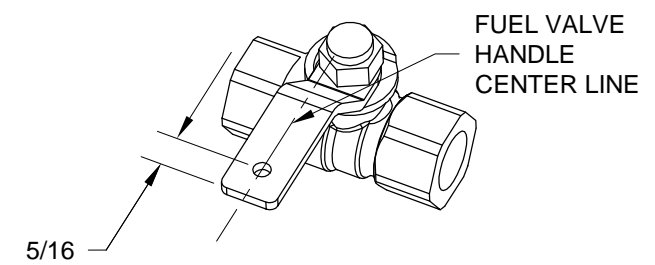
DRILLING THE FUEL VALVE 4161089 HANDLE
